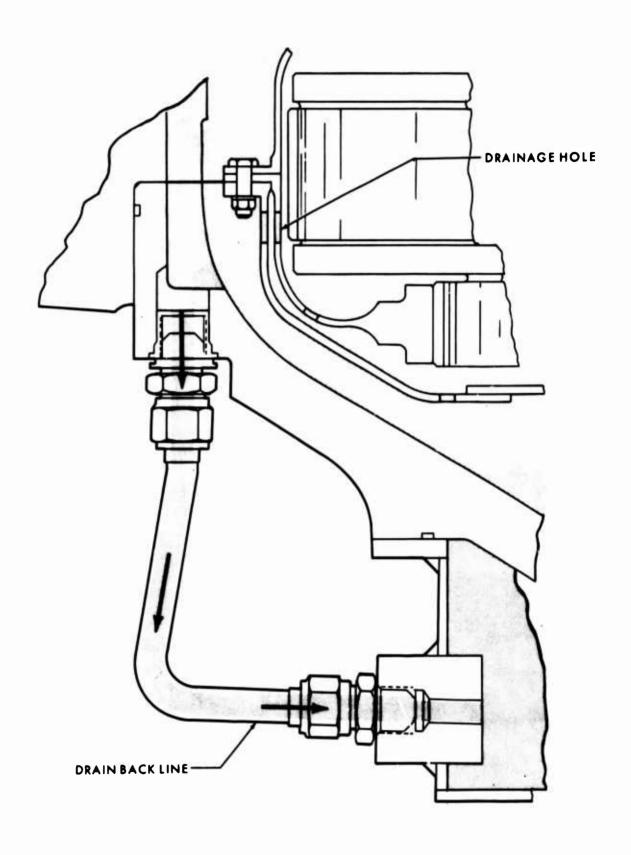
Oil Drainage - Ring Gear/Lower Housing.
